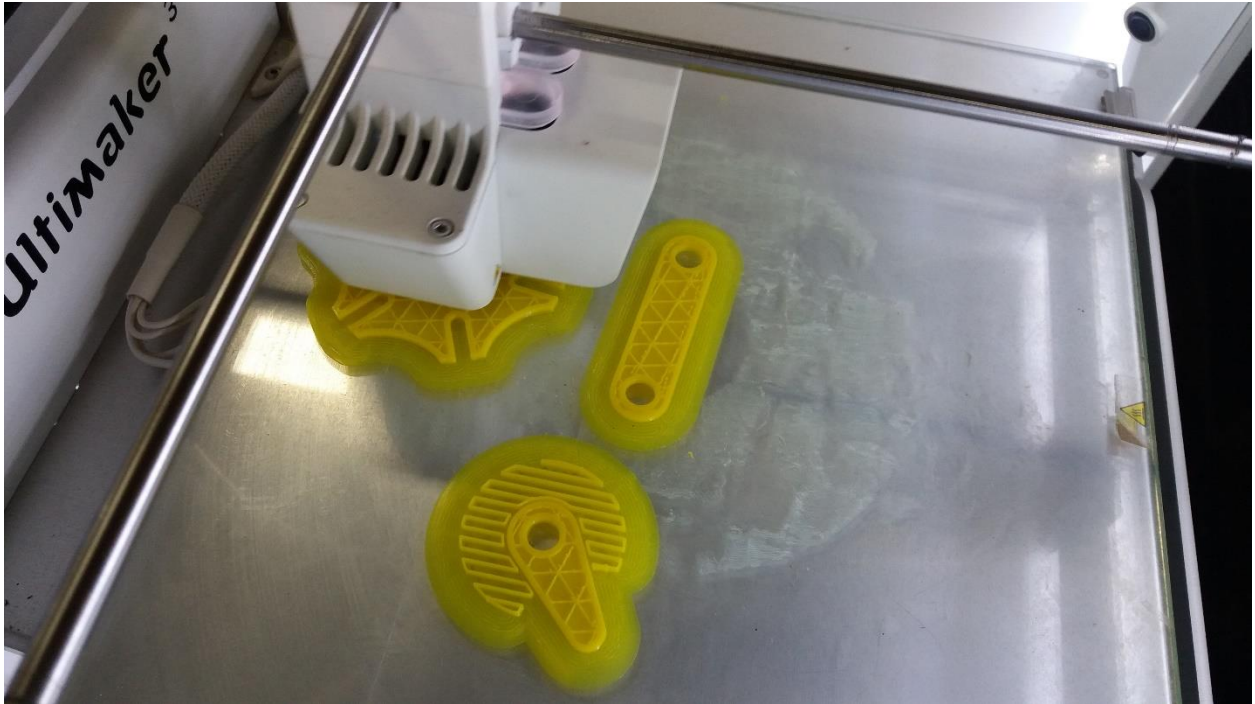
3D Printing by the printer (Ultimaker 3)
